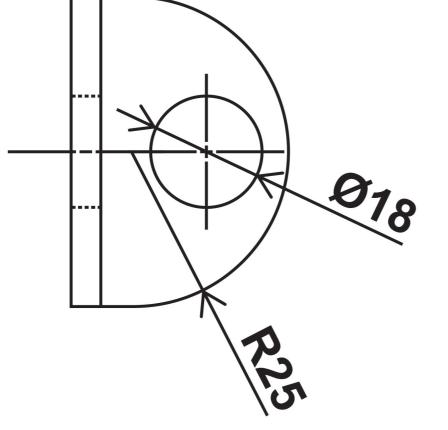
, on page 8, shows a dimensioned orthographic drawing of a component.
